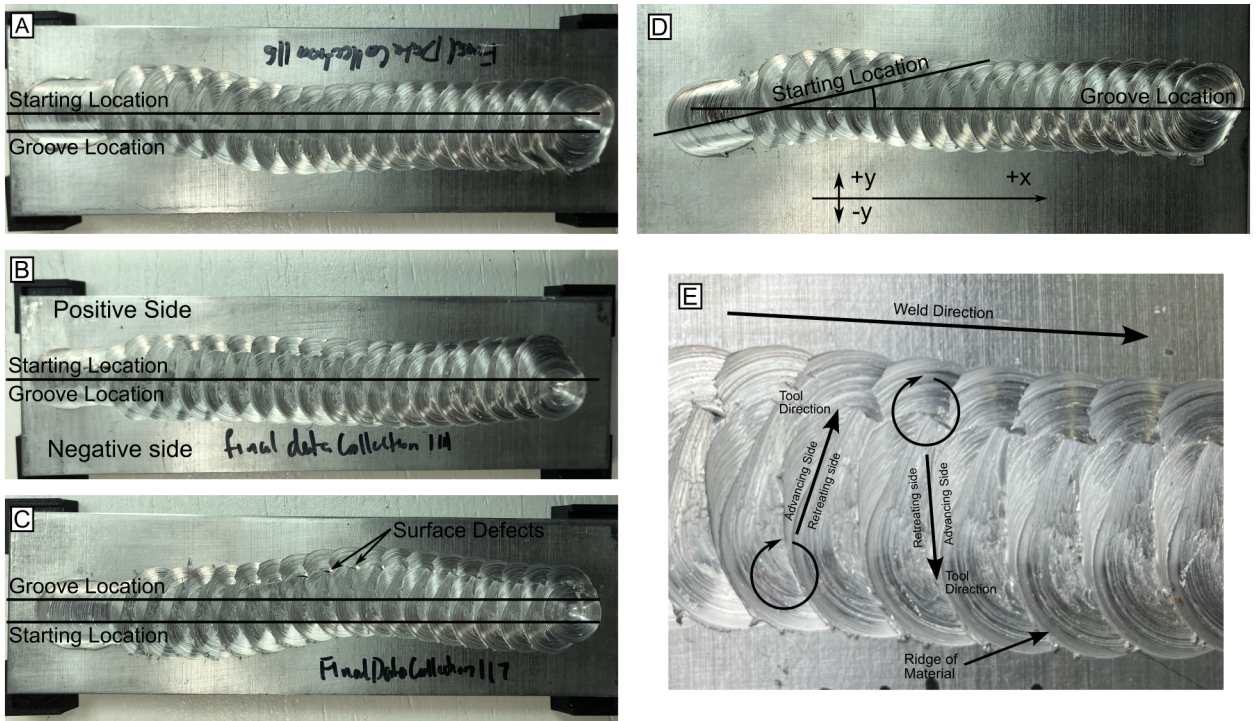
Images of (A) Positive offset, (B) centered, (C) negative offset, and (D) misaligned welds. (E) The path that the weld tool took through the Aluminum stock. The initial path and groove location is indicated for each weld. The tool rotation (E), and directional vectors (D) are also indicated.
